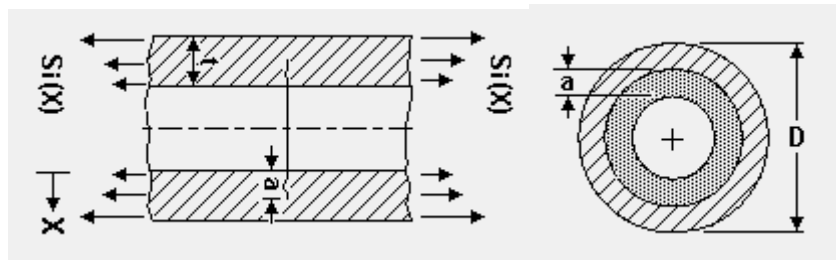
Welded Aluminum Cylinder with Unfused Depth a ($= a_{notch}$).
